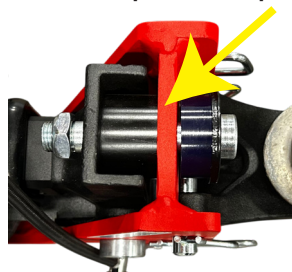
Truck side bump cushion compressed slightly showing proper air compression
